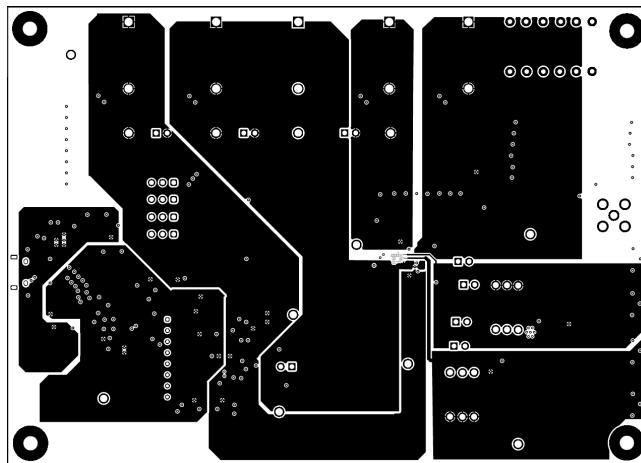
AMC8V208EVM PCB Mid Layer 3 Layout (Power Layer)
